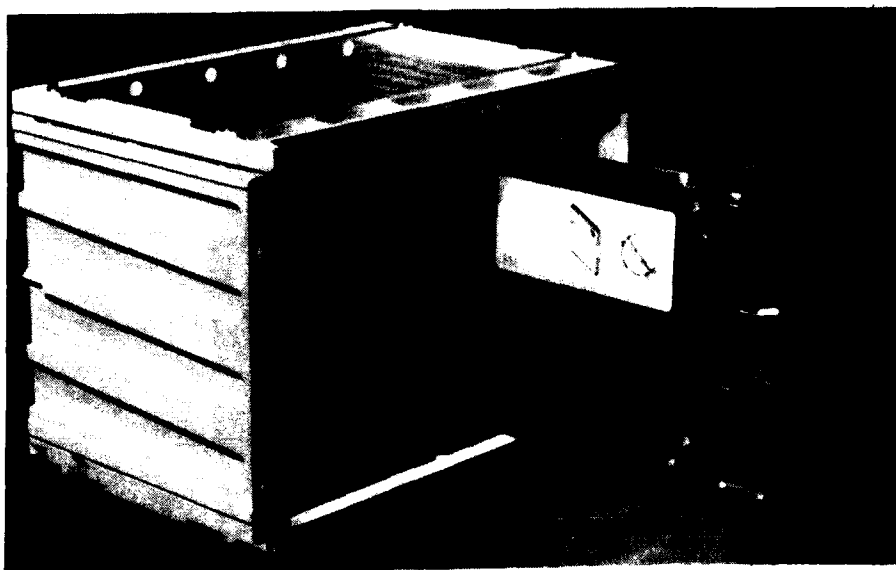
A printed circuit card on printed circuit board packaging hierarchy. A rigid frame system (in contrast to Fig. 4) holds the printed circuit back panels in precise position for terminal pads on the card to mate with contacts supported in the printed circuit board. The cards with terminals on both ends slide into place in the contact system with zero insertion force (ZIF). The cards typically have 4 wiring planes and as many as 4 power planes while the printed circuit boards have as many or more layers. Several of these frames may be cabled together in the larger systems.
